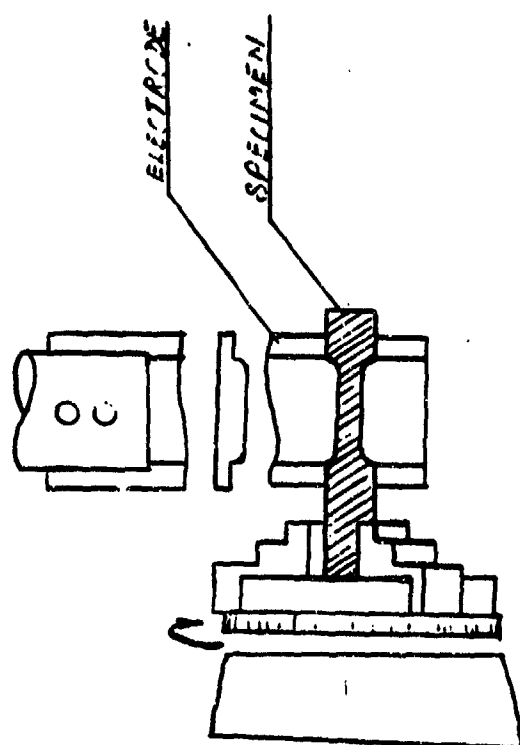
Rotating assembly and electrode for cylindrical specimen.
